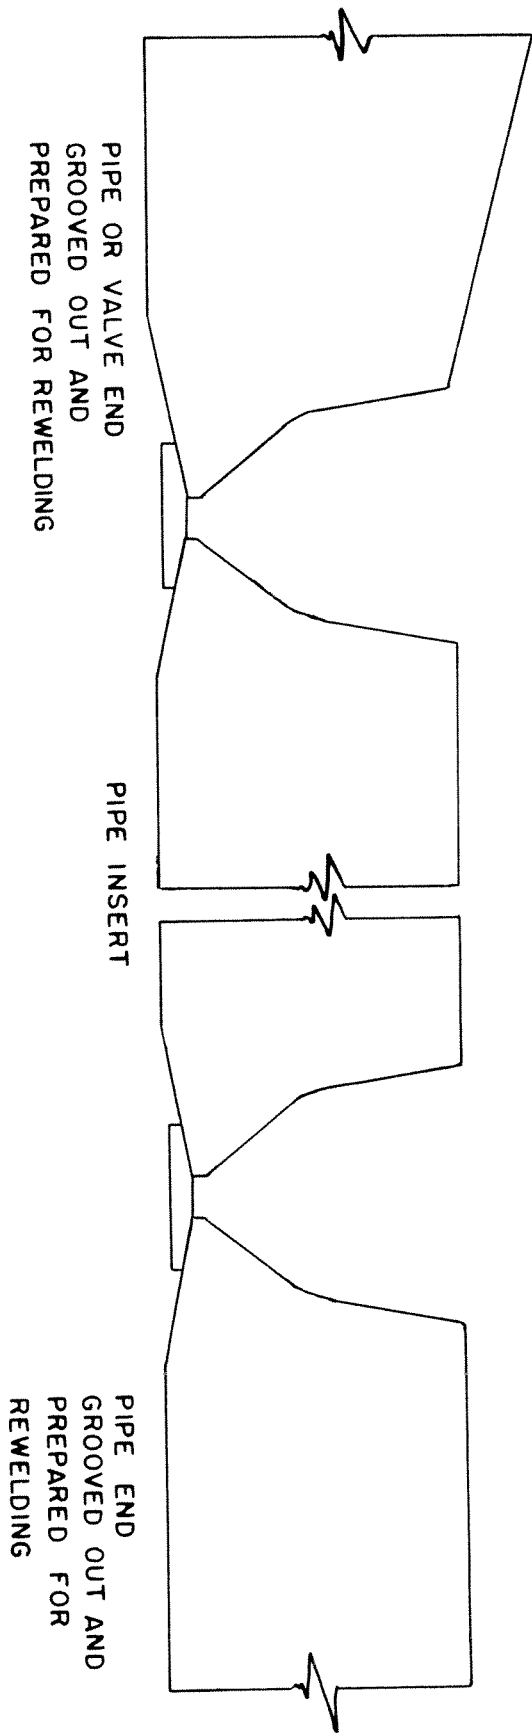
Sketch illustrating inserting of pipe section to compensate for several weld joints completely grooved out, pulled together, fitted-up and rewelded.
